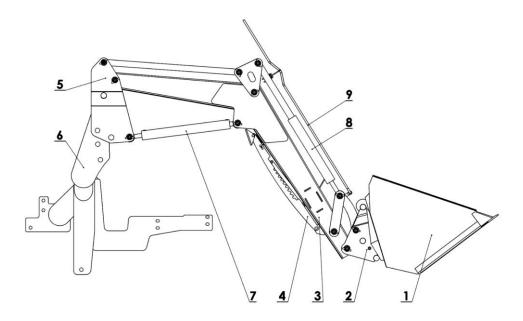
T812 Loader design 1 - work tool, 2 - coupling frame, 3 - jib, 4 - bracket, 5 - fixing plate, 6 - support frame, 7 - jib cylinder, 8 - frame cylinder, 9 - levelling indicator.
